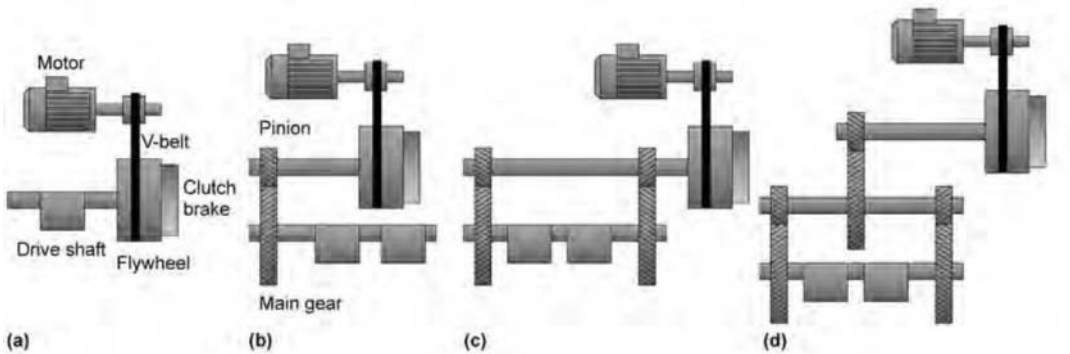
(a) Direct drive (nongearred), (b) single gear reduction-single end drive, (c) single gear reduction-twin end drive, and (d) double gear reduction.
